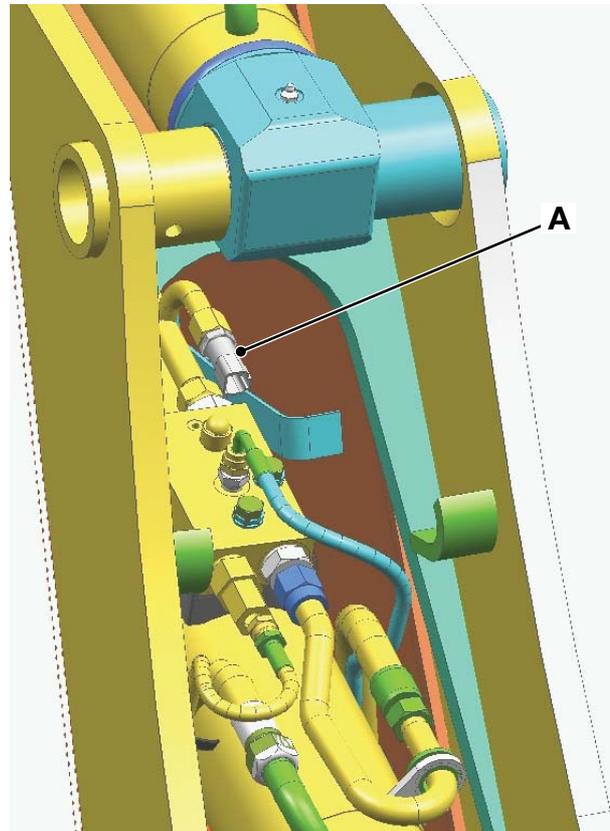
Excavator with Boom Hose Burst Check Valve shown. C086000
